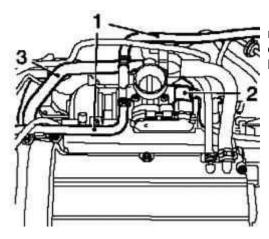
Removal of cooling nozzles to throttle: 1, 3 - schlangi coolant 2 - connector wiring harness throttle tube
